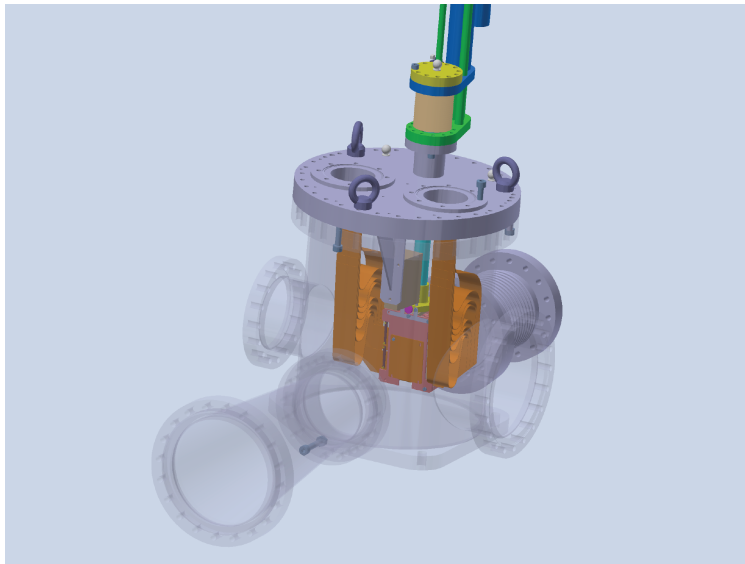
The four plane electron detector assembly shown inside the vacuum chamber that is connected to the beam line vacuum. This CAD model shows the existing setup, requiring many ribbon cables for readout. The chamber will be reused, but a new flange with a new set of feedthroughs will be designed, with new cable arrangement and cooling line.
